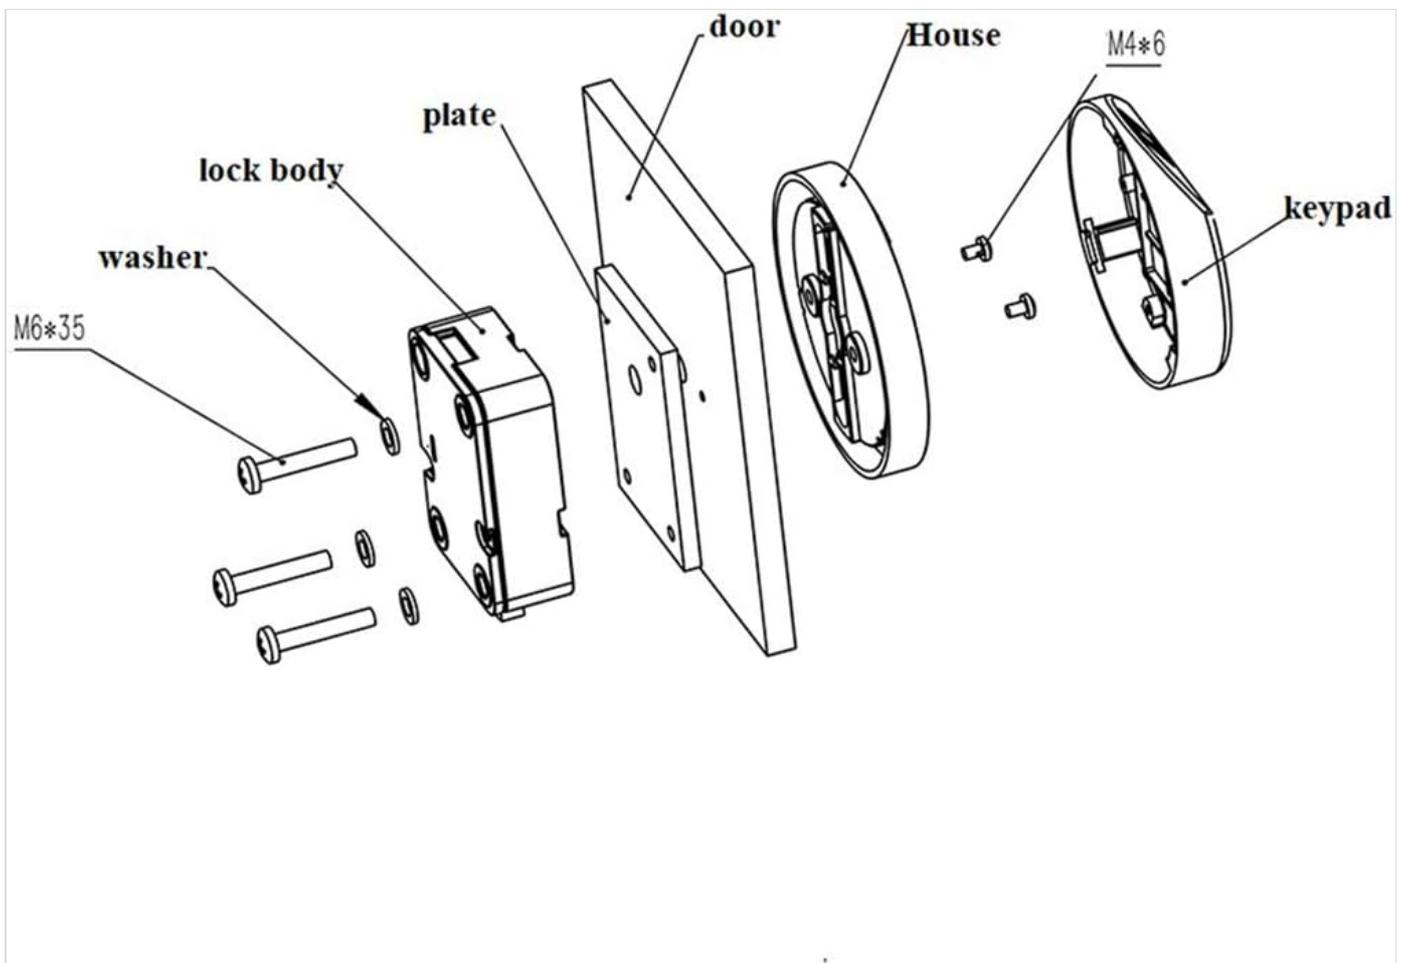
Exploded diagram illustrating the assembly sequence of the lock components onto a safe door.
